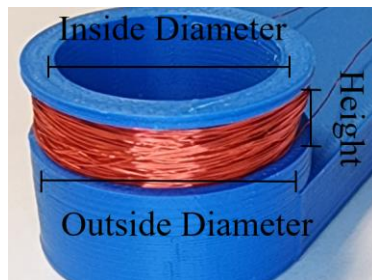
Measurements for dimensions of a coil where the inside diameter is the inside measurement of the coil and not of the coil housing.
